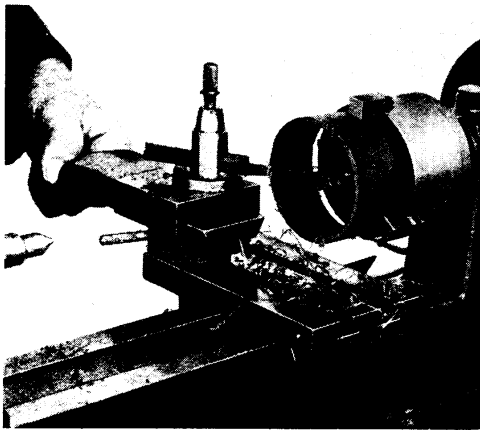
Ebonite tube former for a variometer held in the chuck of a lathe for turning. The tool is held on a slide rest
